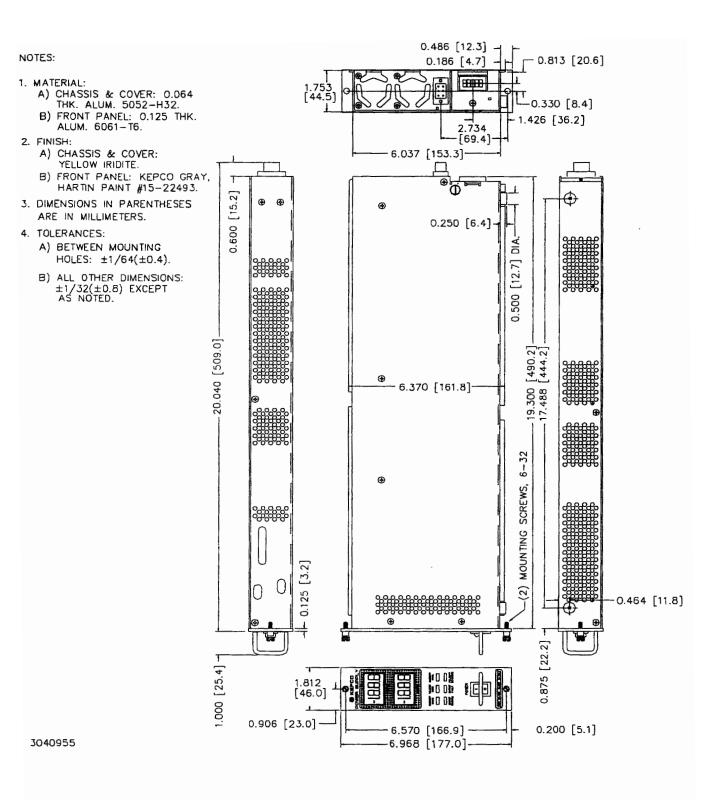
MST POWER SUPPLY, MECHANICAL OUTLINE DRAWING
